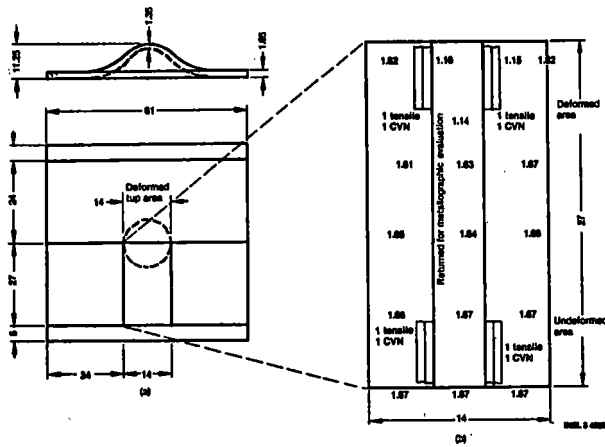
Thickness Measurements {mm} and Locations of Test Specimens Removed From Plate DH-26-04-83-160; a. General Schematic, b. Section Removed From Plate
